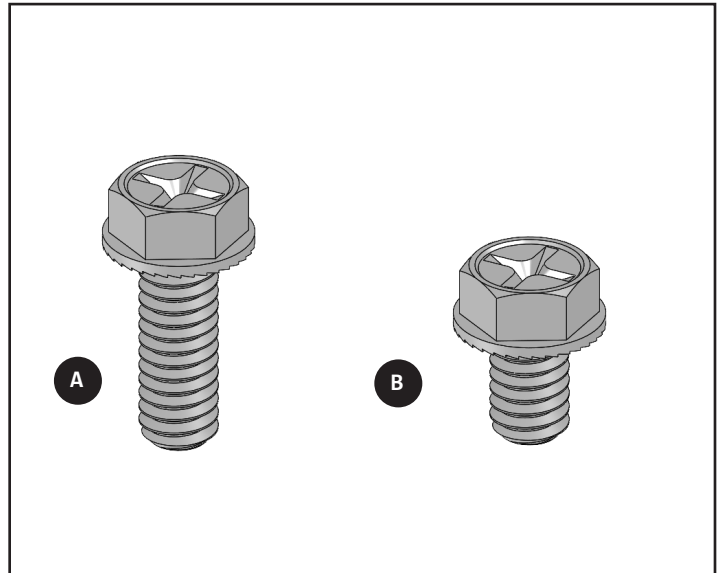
Be sure to use the correct mounting screws. Use the longer screws (A) with the spacer and the shorter screws (B) without the spacer.
